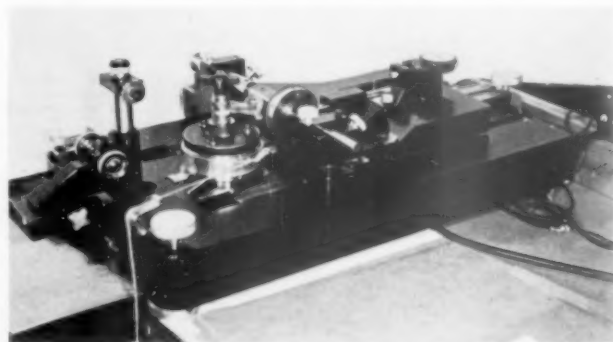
Gauge for checking angular errors of worm gear sectors.
